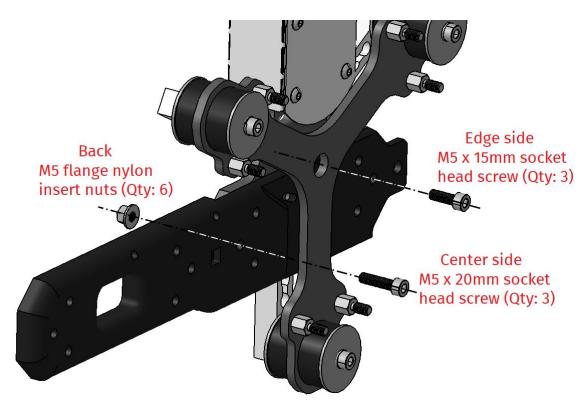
Fasteners to tighten the special mount and the load measurement unit
